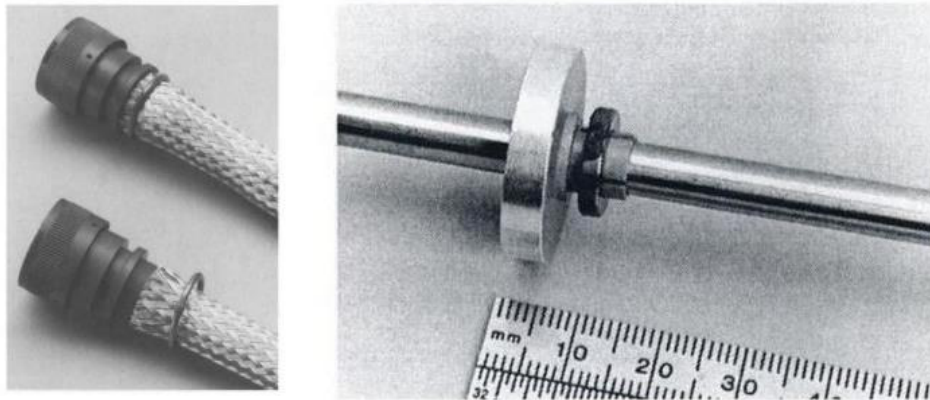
(a) A shape memory ring using for fastening the braid against a controlled surface on the adapter and (b) prototype of a gear blank assembled on a shaft using a NiTiNb ring (Otuska and Wayman, 1998).
